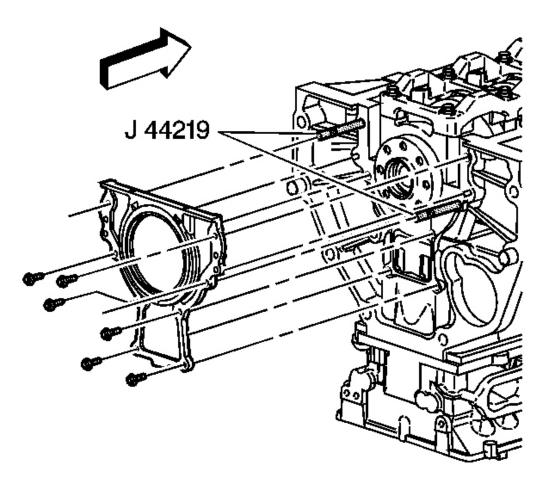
View Of J 44219 Installed In Engine Block Courtesy of GENERAL MOTORS CORP.
